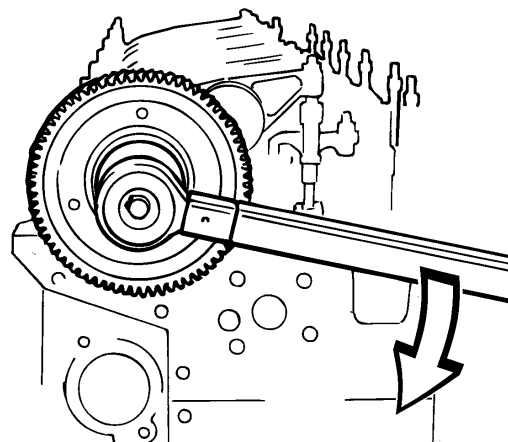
Torque-tightening the crankshaft drive gear bolt
